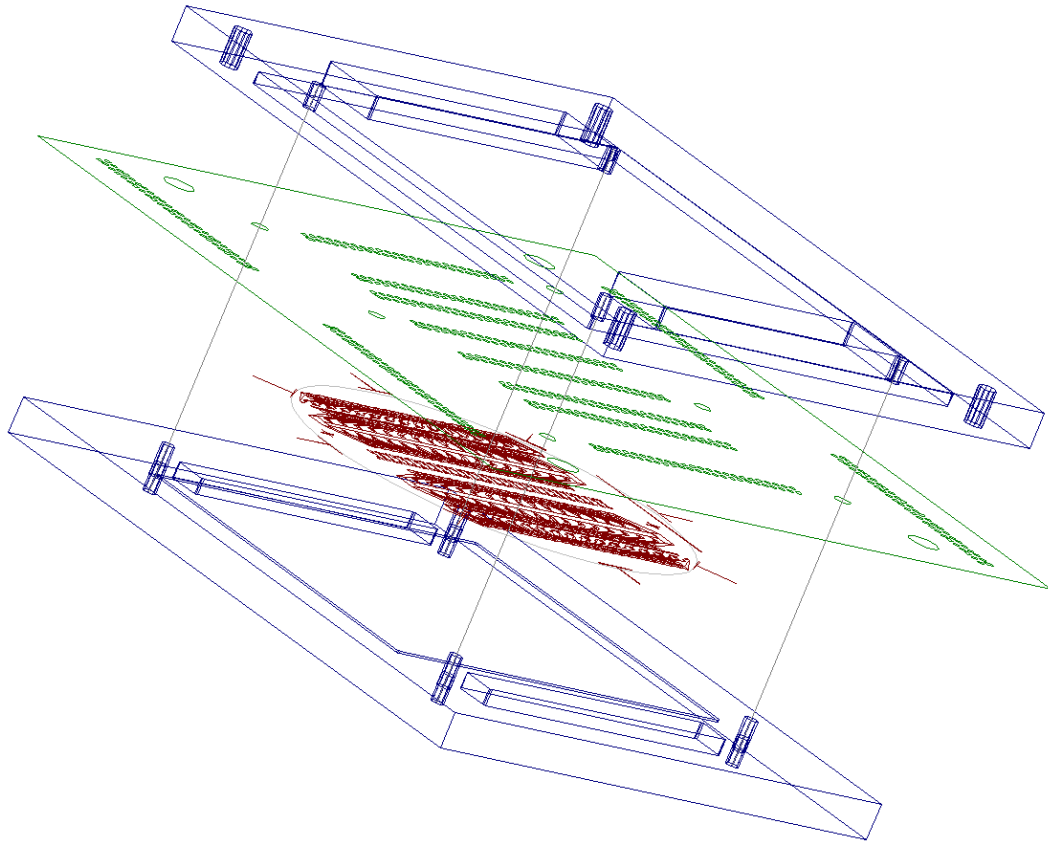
Exploded view of the entire assembly, with holder (blue), PCB (green) and wafer (red).
